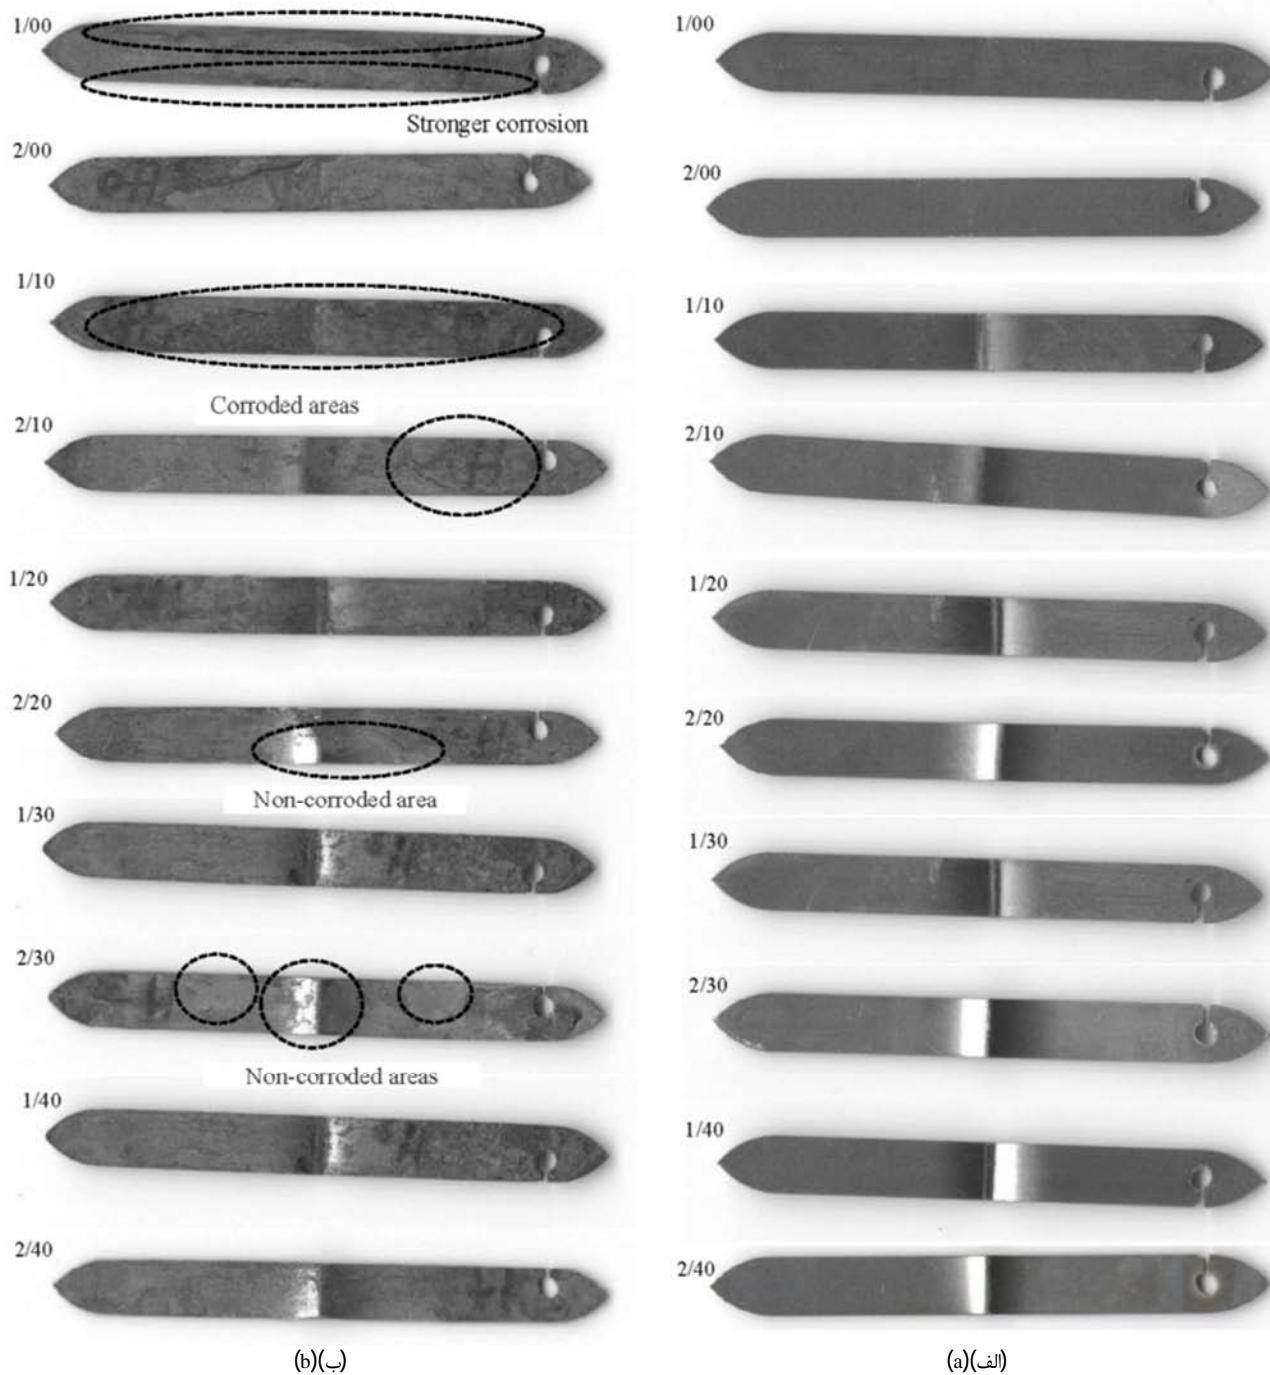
Three layered sheet specimens; (a) before salt spray test, (b) after salt spray test
